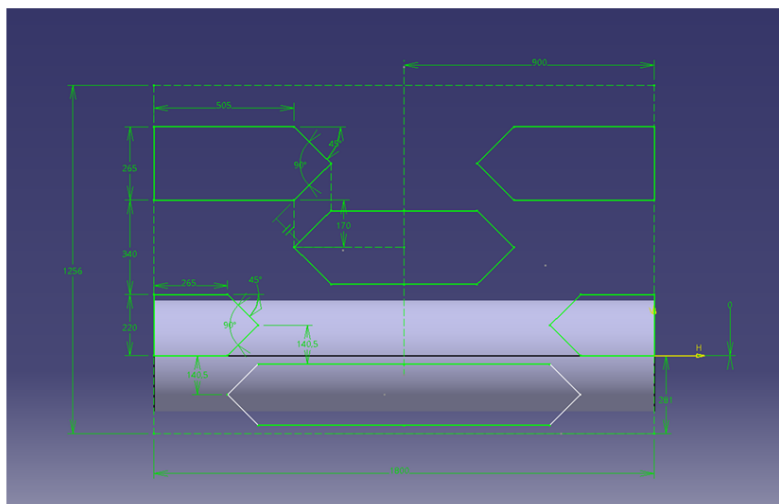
Patch sketch to be enveloped on the base cylinder
